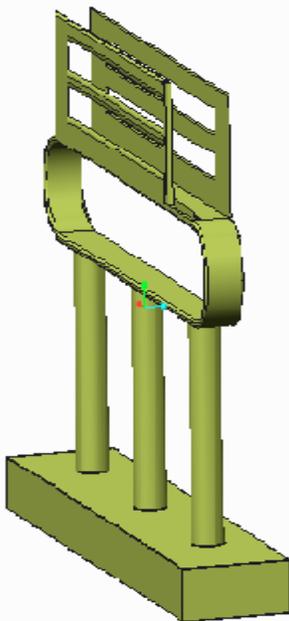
Pro-e Prototype of Precision Indexing Conveyor System
